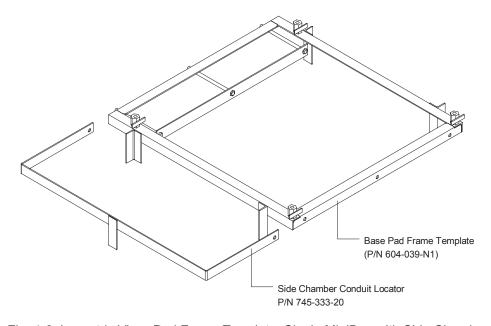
, Isometric View, Pad Frame Template, Single MiniBay with Side Chamber
